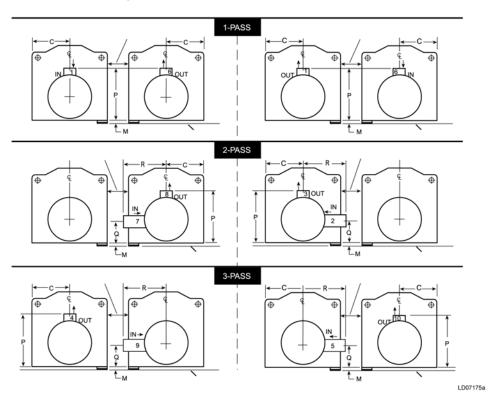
Dimensions of evaporator marine waterboxes ft in. (mm)
